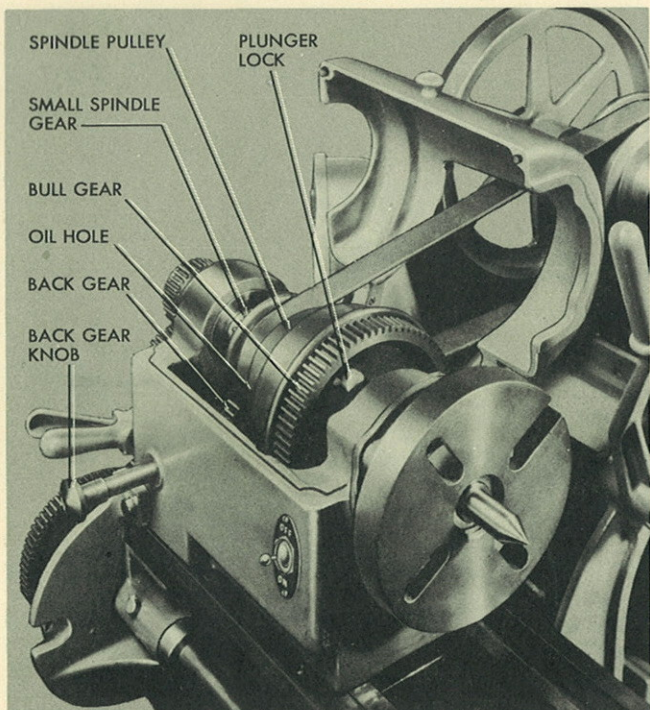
HEADSTOCK WITH PULLEY ARRANGEMENT
